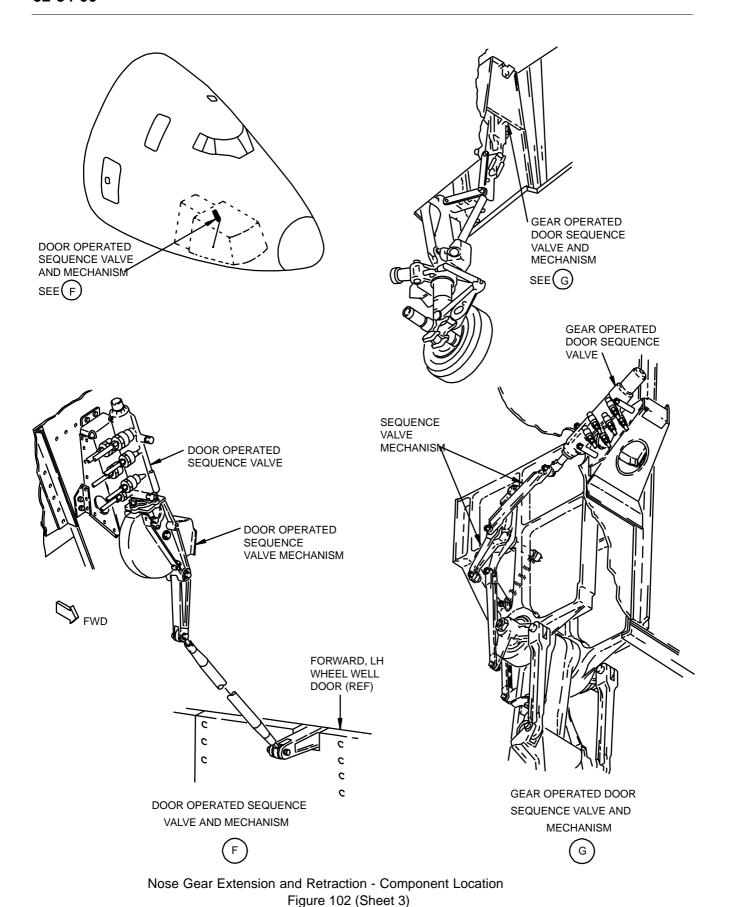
32-34 Nose Gear Ext./Ret. Comp. Location Fig. 102 (Sheet 3)
